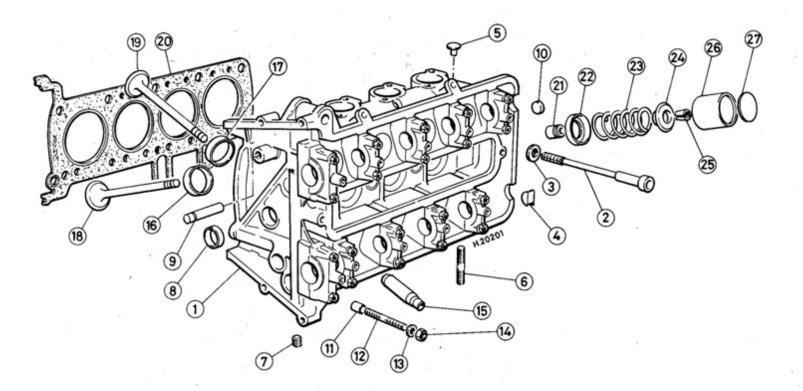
Cylinder head and valves - 100 models (75 similar)
